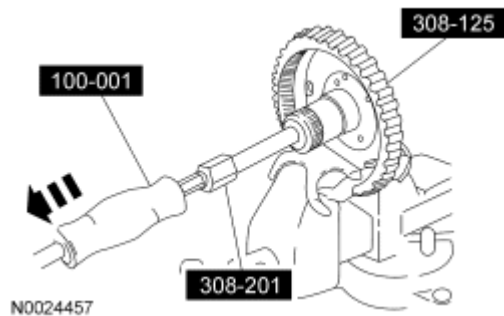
Removing No. 16 Reverse/Overdrive Ring Gear Bearing Using Special Tools
